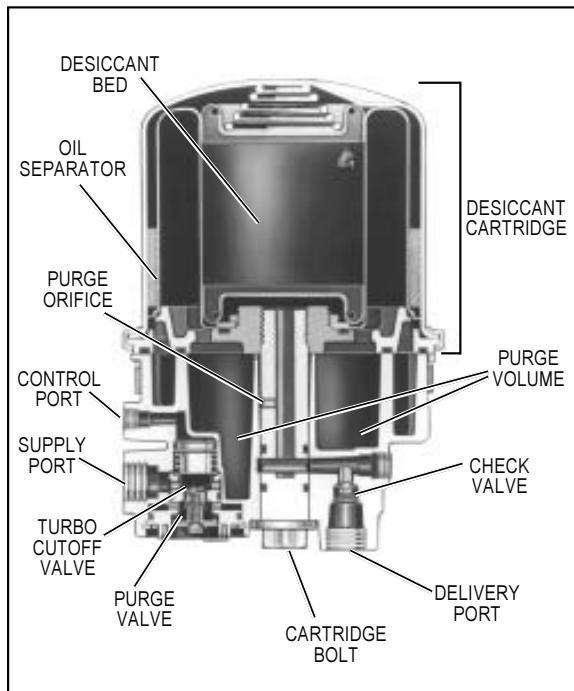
AD-IP AIR DRYER SECTIONAL VIEW
